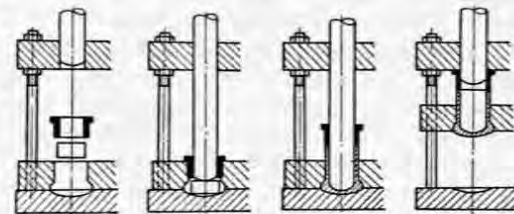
Extrusion of a cylinder liner from a cylindrical blank.
